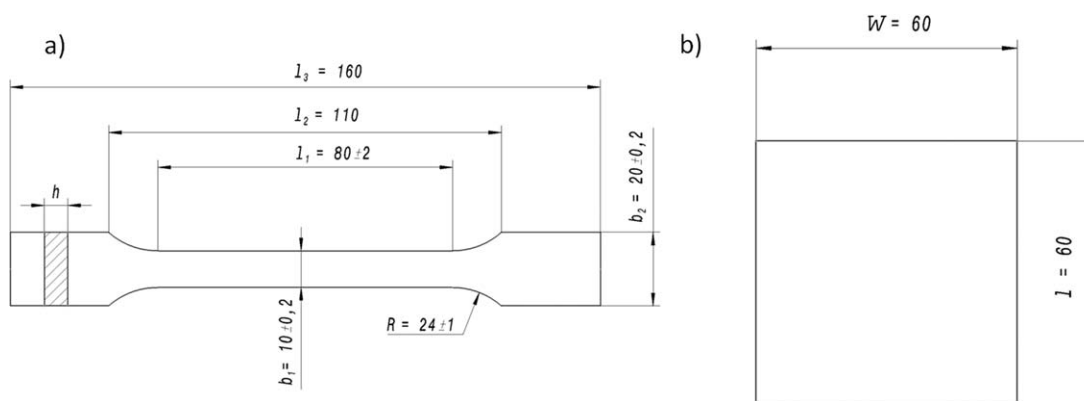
Drawing of used specimen according to ISO 3167 (a) and ISO 294-3 (b), dimensions in mm.
